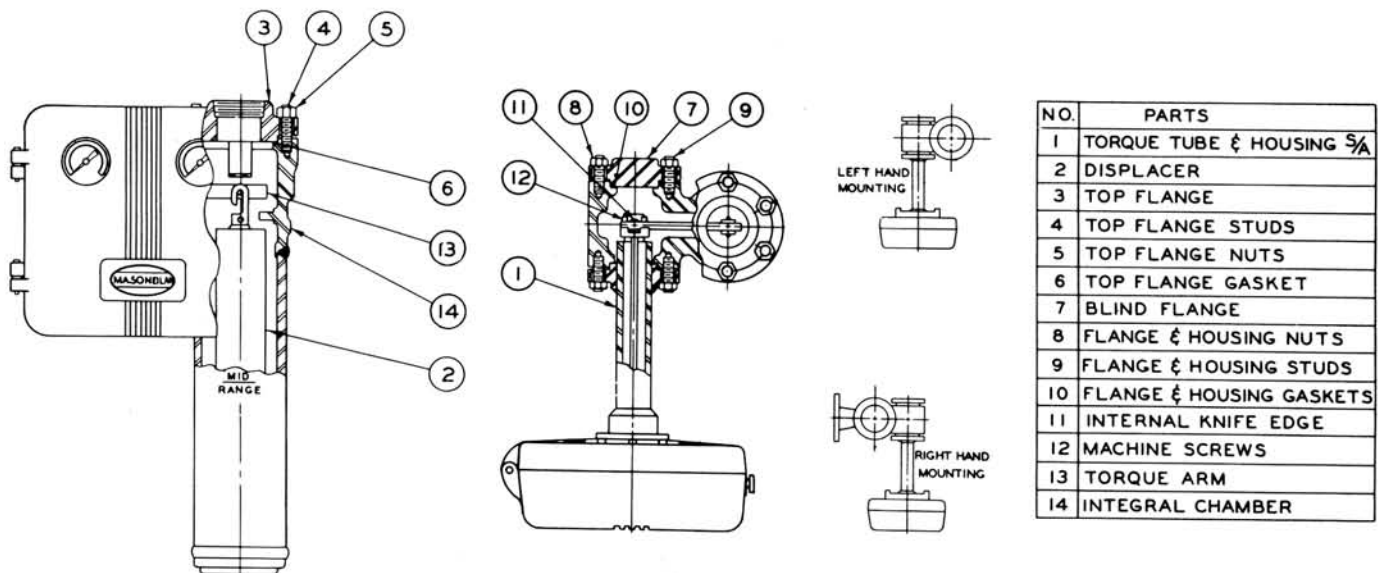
Displacer, Torque Arm, Instrument Mounting
